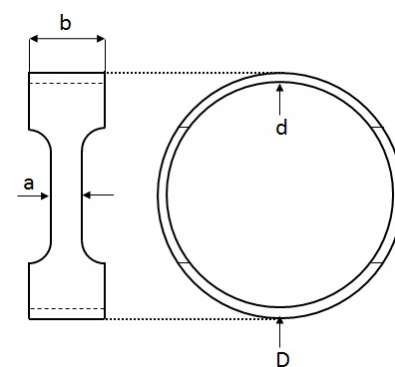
Dog-bone shaped specimen cut from a tube. a is 1 mm, b is 3 mm, d is 9.35 mm and D is 10.5 mm.
